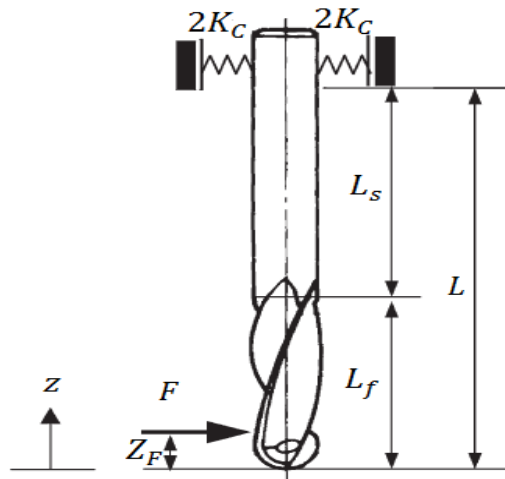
Cutter deflection model: Ball-end mill diagram showing cutter deflection system [2]
